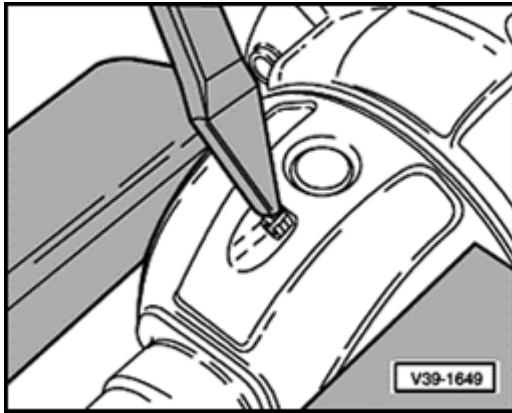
Removing and installing differential bevel gear shaft spring pin
